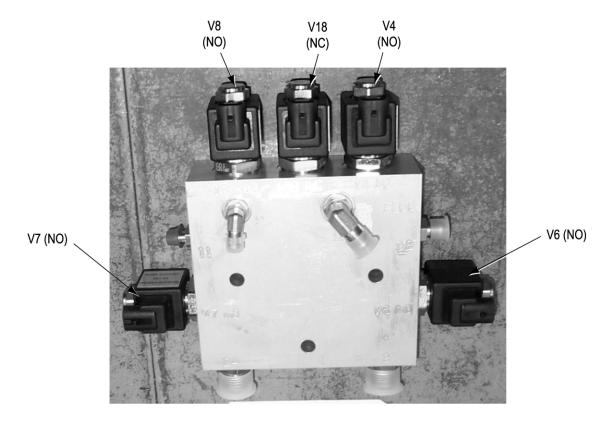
Electrical Connections on Aft Manifold Assembly
